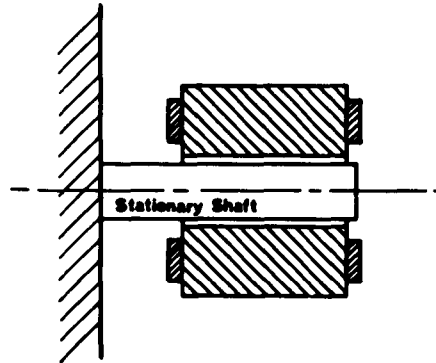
Schematic Representation of Rotating Bearing On Stationary Shaft.
